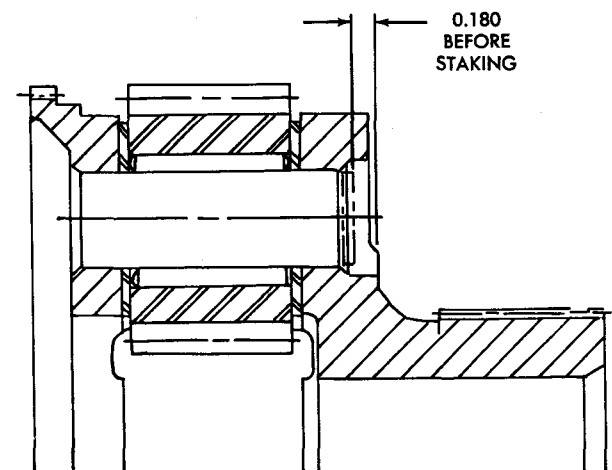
Forward-range planetary carrier assembly—cross section, showing pin dimensions
